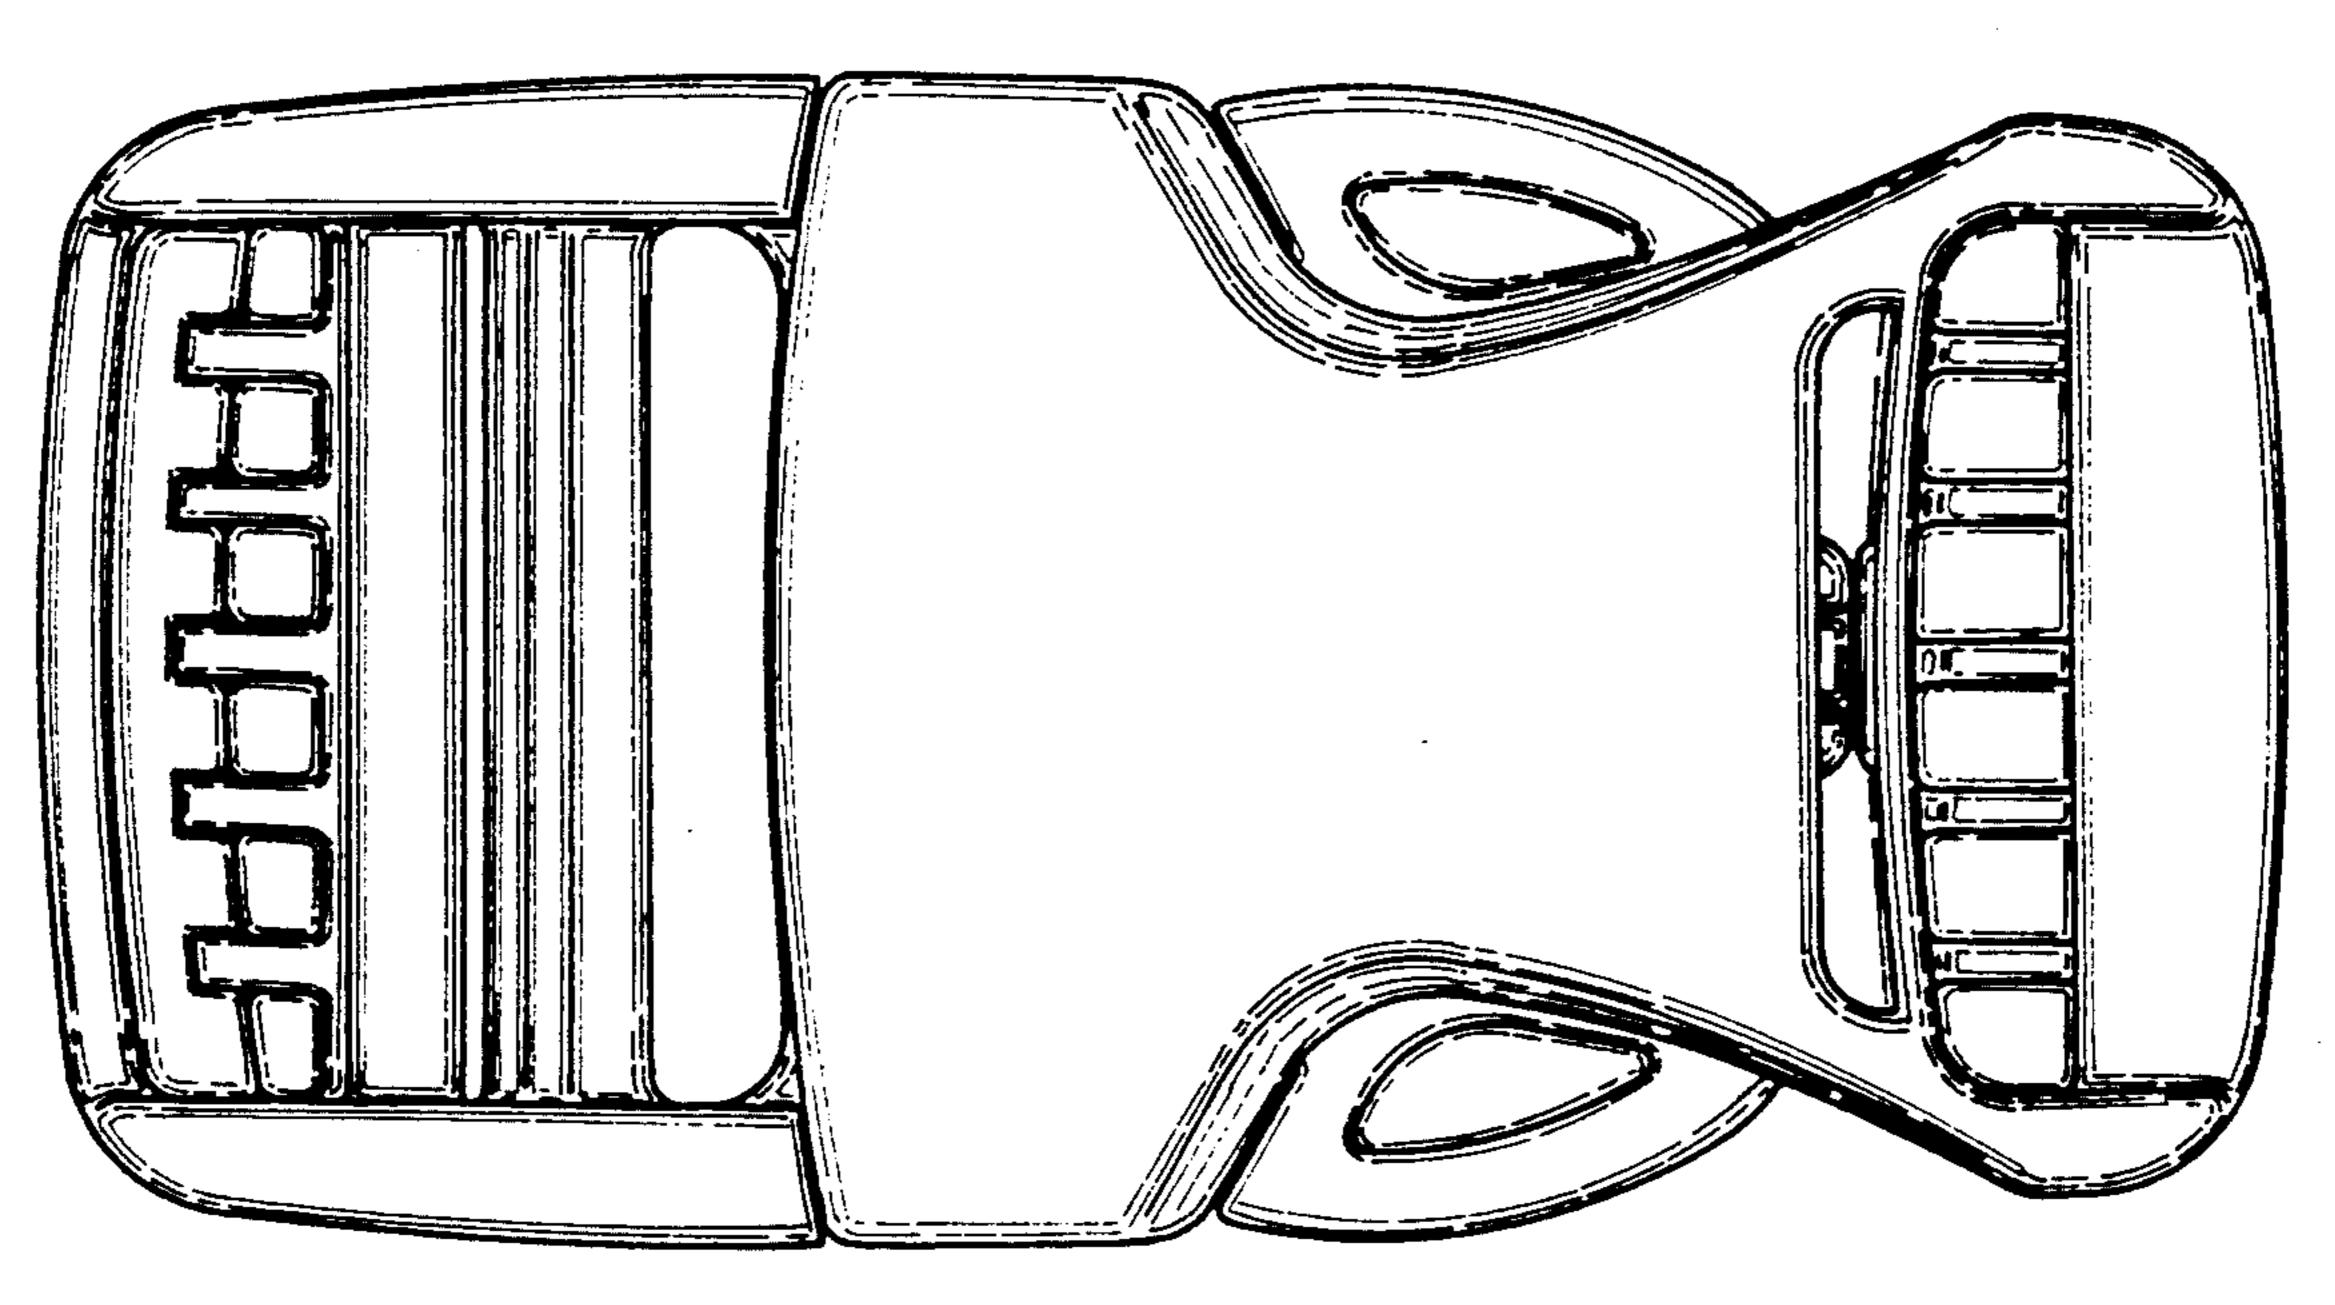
is a front elevational view of the two-piece snap-engagement type buckle clasp mechanism with the first and second elements or components thereof connected together as shown in FIG. 13;
